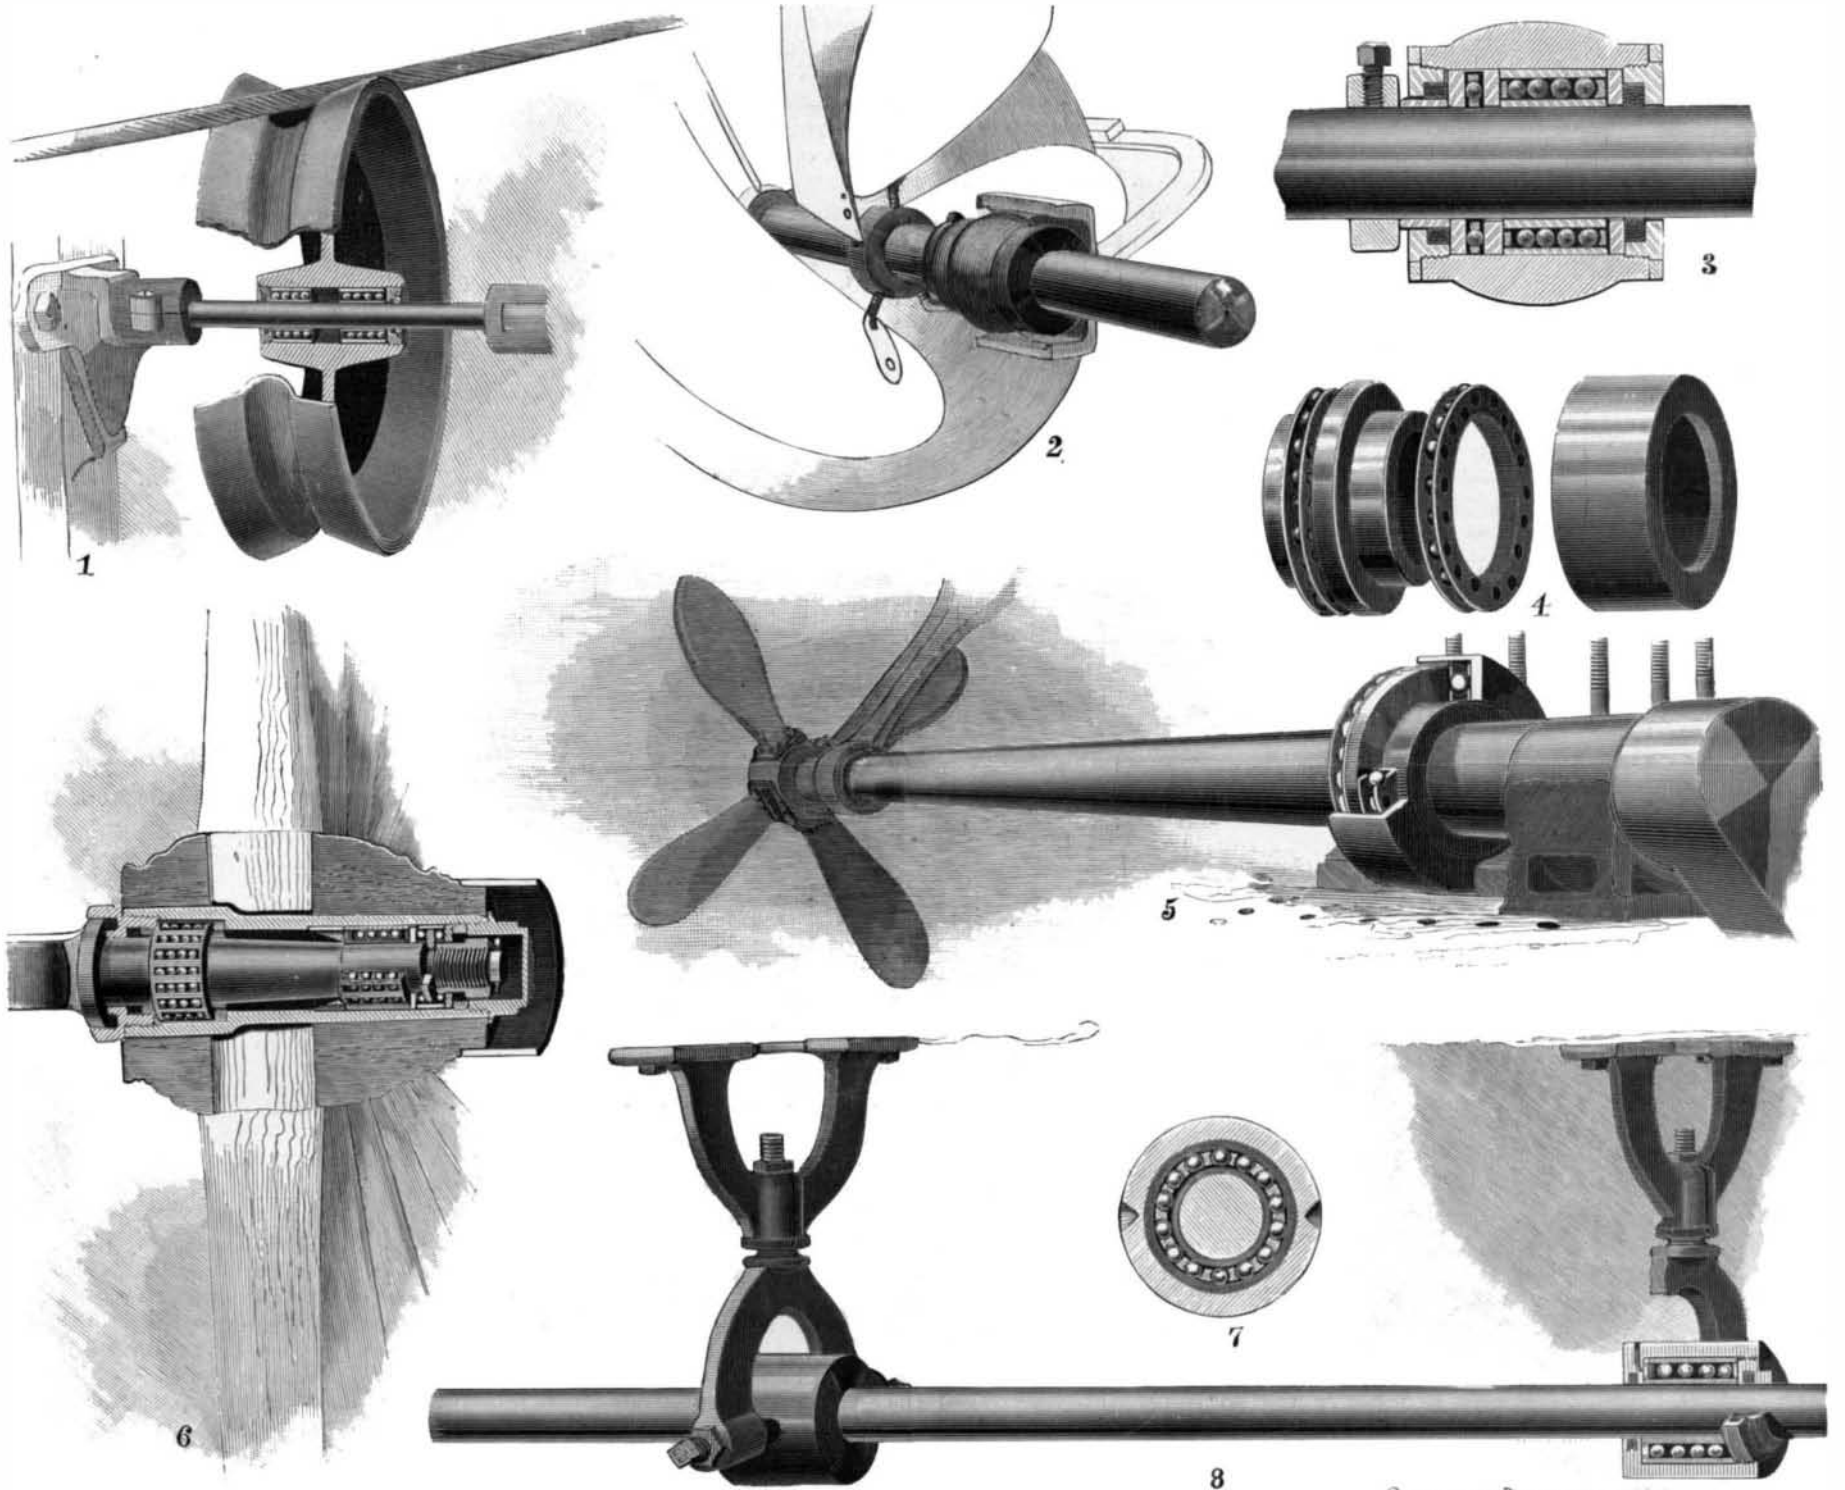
illustrates a fan rotated on ball bearings. In Fig. 3 we have a new element introduced—the end thrust bearing. The bearing, with four balls close together, is the section of the regular radial bearing just described. To its left is seen a second circle of balls that are contained between two brass plates, which form for them a cage, and the balls bear to right and left on hardened steel washer plates. This gives
